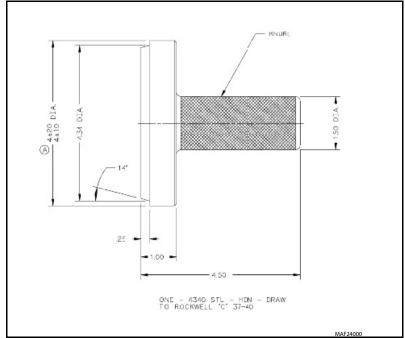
Bearing Cup Pressing Tool (T149013)
